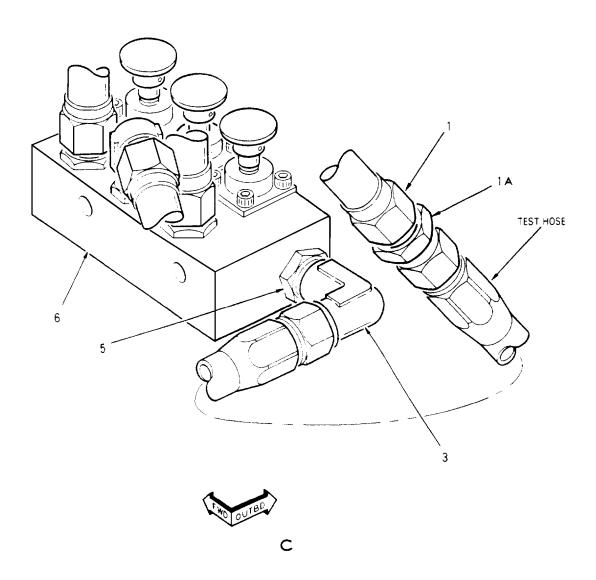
Fuel Level Control Selector Valve Hookup (Sheet 3)
